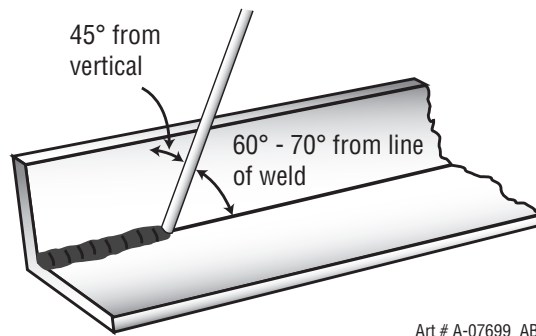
Electrode Position for HV Fillet Weld
